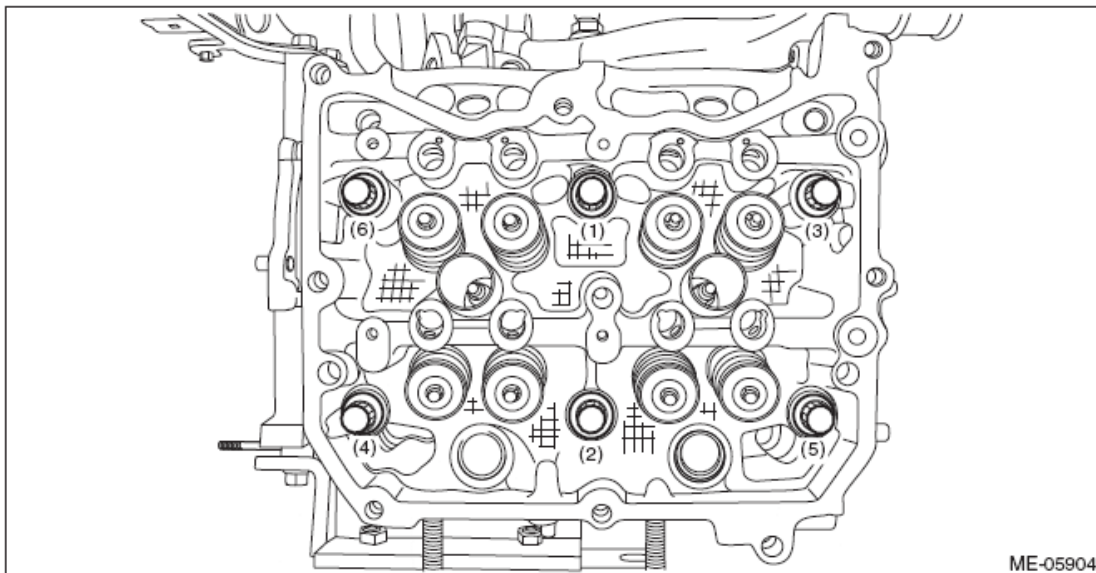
Identifying Cylinder Head Bolts Tightening Sequence
